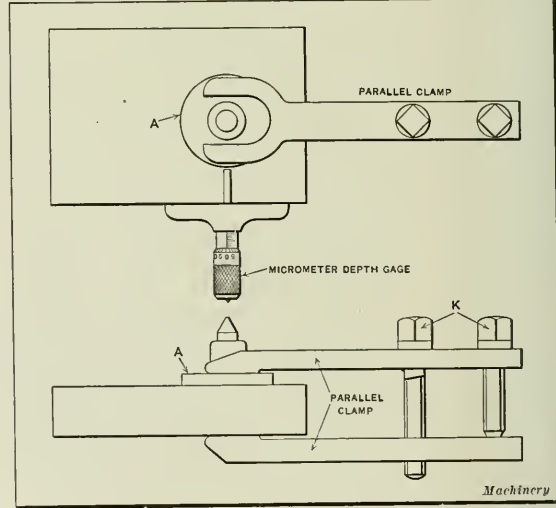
Method of locating Hole by Use of Centering Plug, Parallel Clamp and Depth Gage
